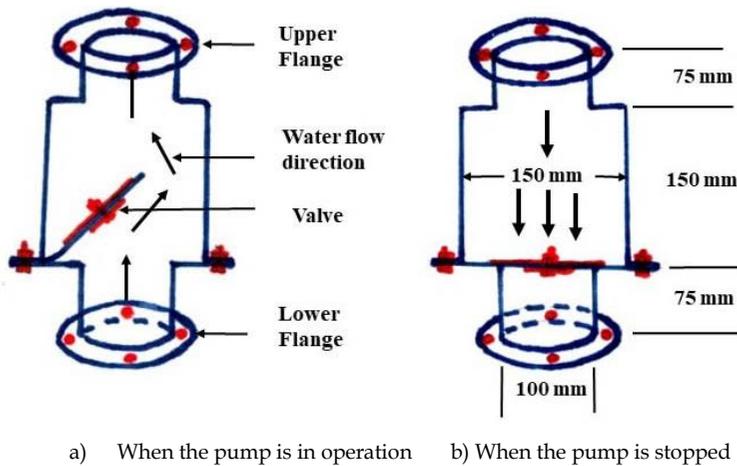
Working principles of *check valve* with different parts and dimensions.
